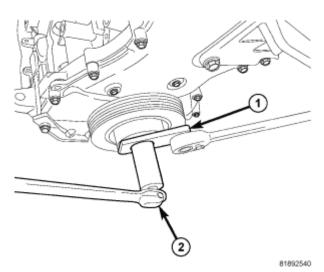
DAMPER REMOVAL Courtesy of CHRYSLER LLC
